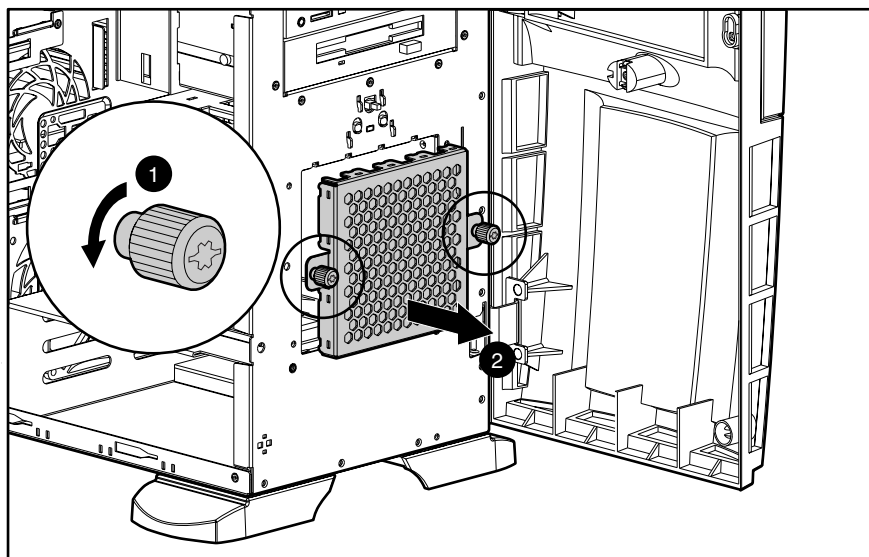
Removing the drive bay cover from a non-hot-plug hard drive cage
